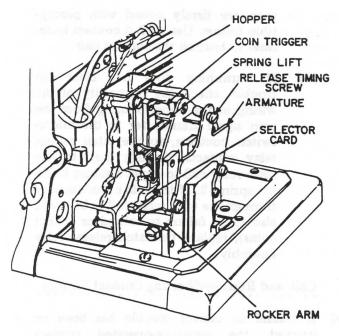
Single Coil Coin Relay, Installed, Cover Removed.
